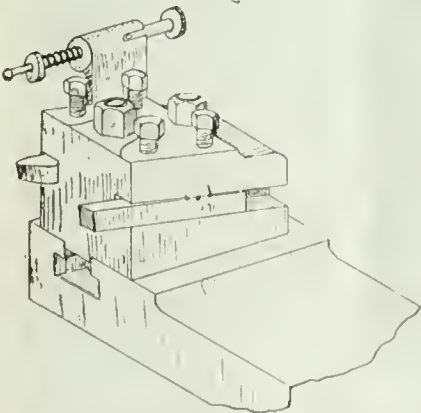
SKETCH OF TOOL BLOCK USED IN BASE FACING AND RECESSING.
